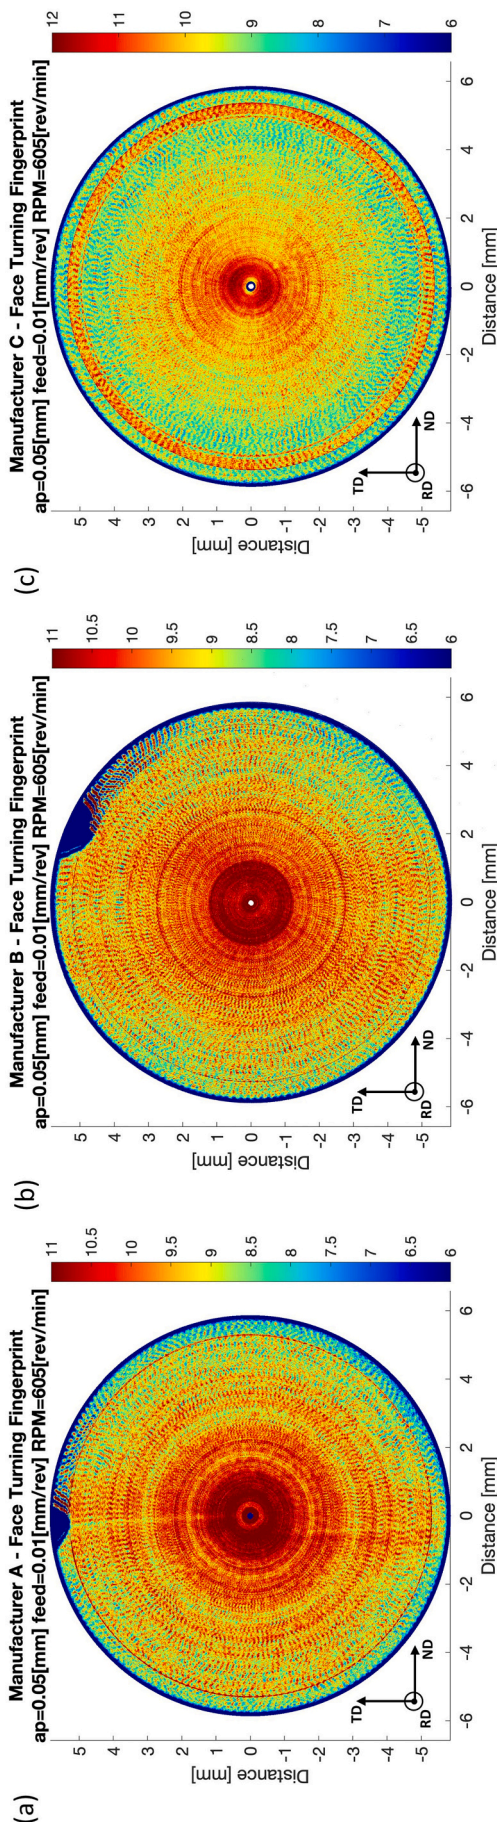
Face Turning Fingerprint reconstruction (FL) of the head cross section for all three manufacturers, $ap = 0.05$ [mm], $feed = 0.01$ [mm/rev] and $RPM = 605$ [rev/min] test conditions.
